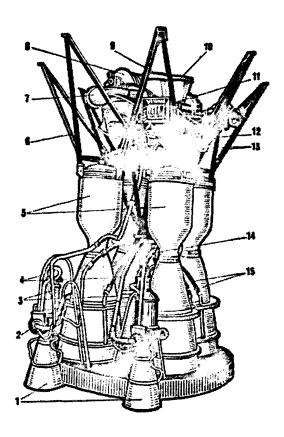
RD-107 Liquid Rocket Engine: 1 -- steering chambers;
